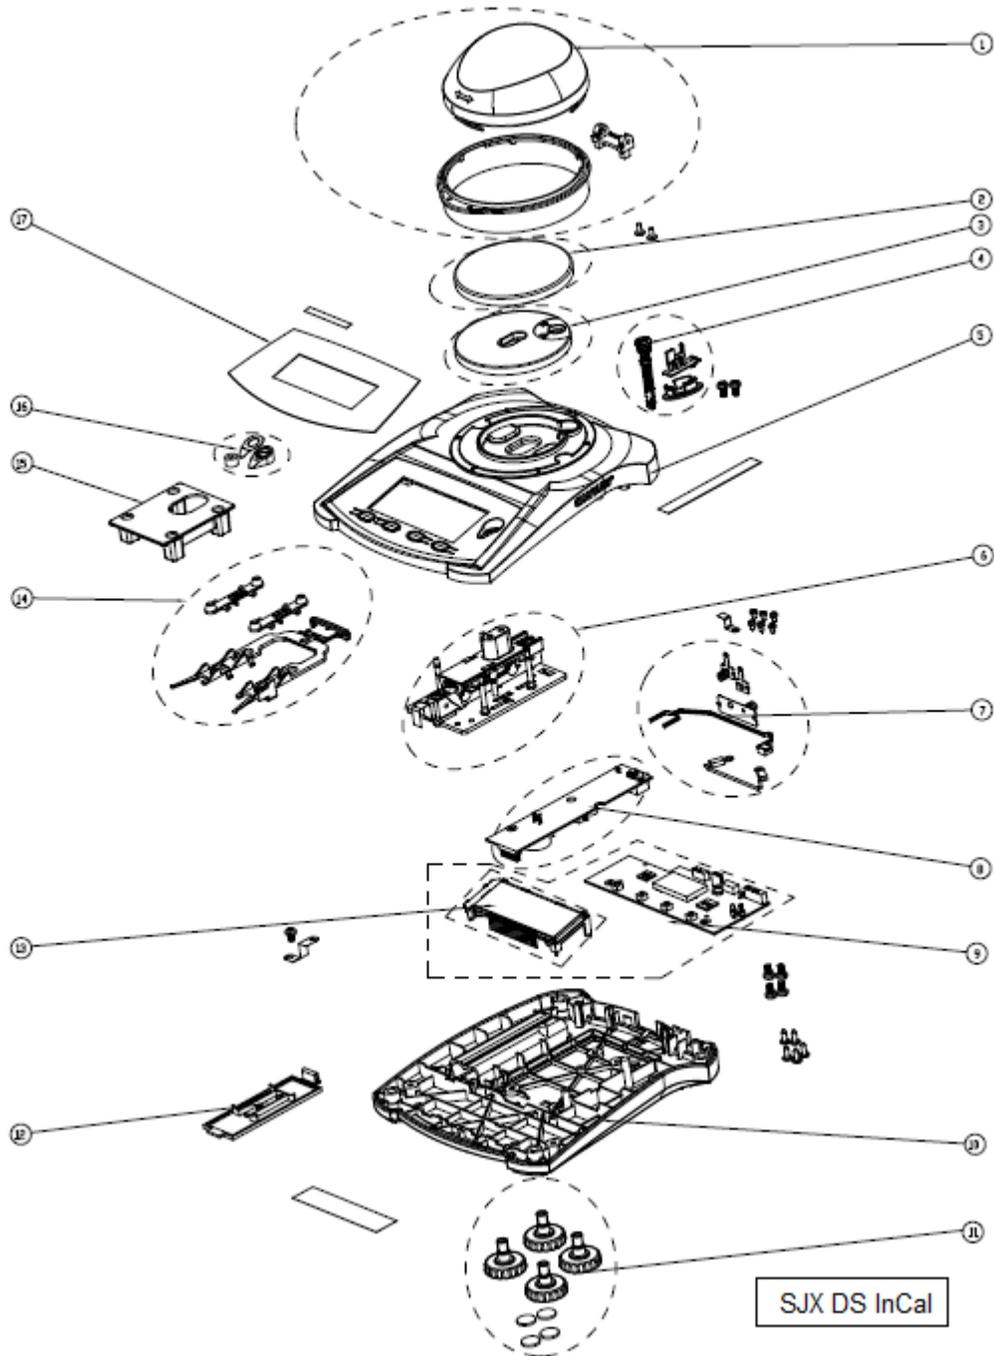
SJX Jewelry DS InCal Models: Housing & Parts
